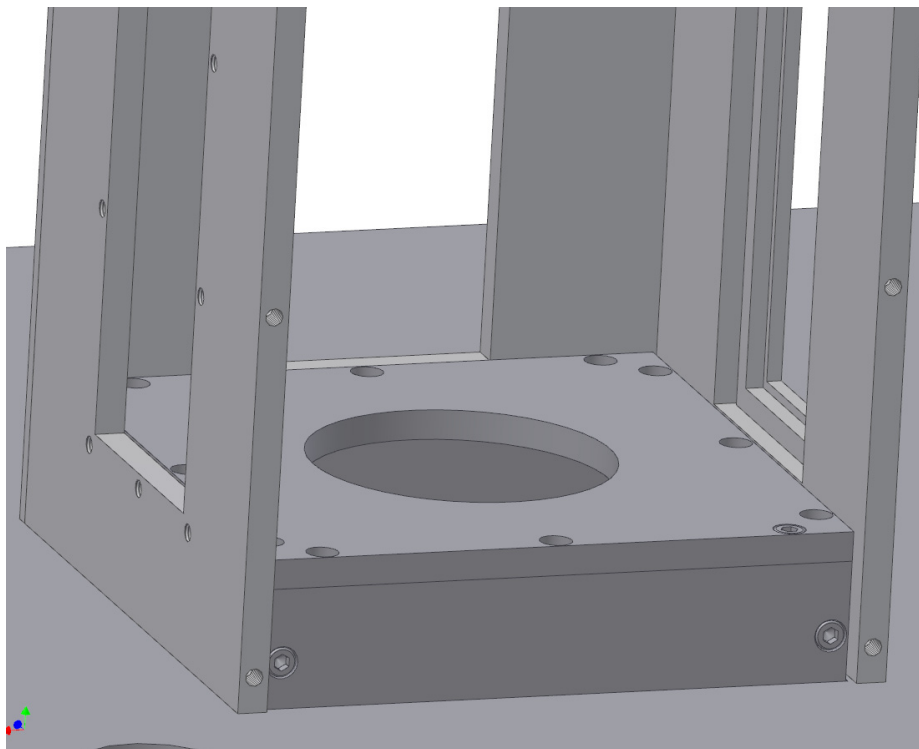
CAD drawing of the fitting for the coflow upper part, inside the chamber.
